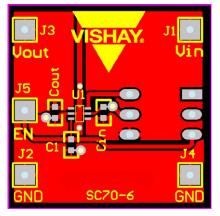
Top, PCB Layout for SC-70-6 (board size: 1" x 1")
